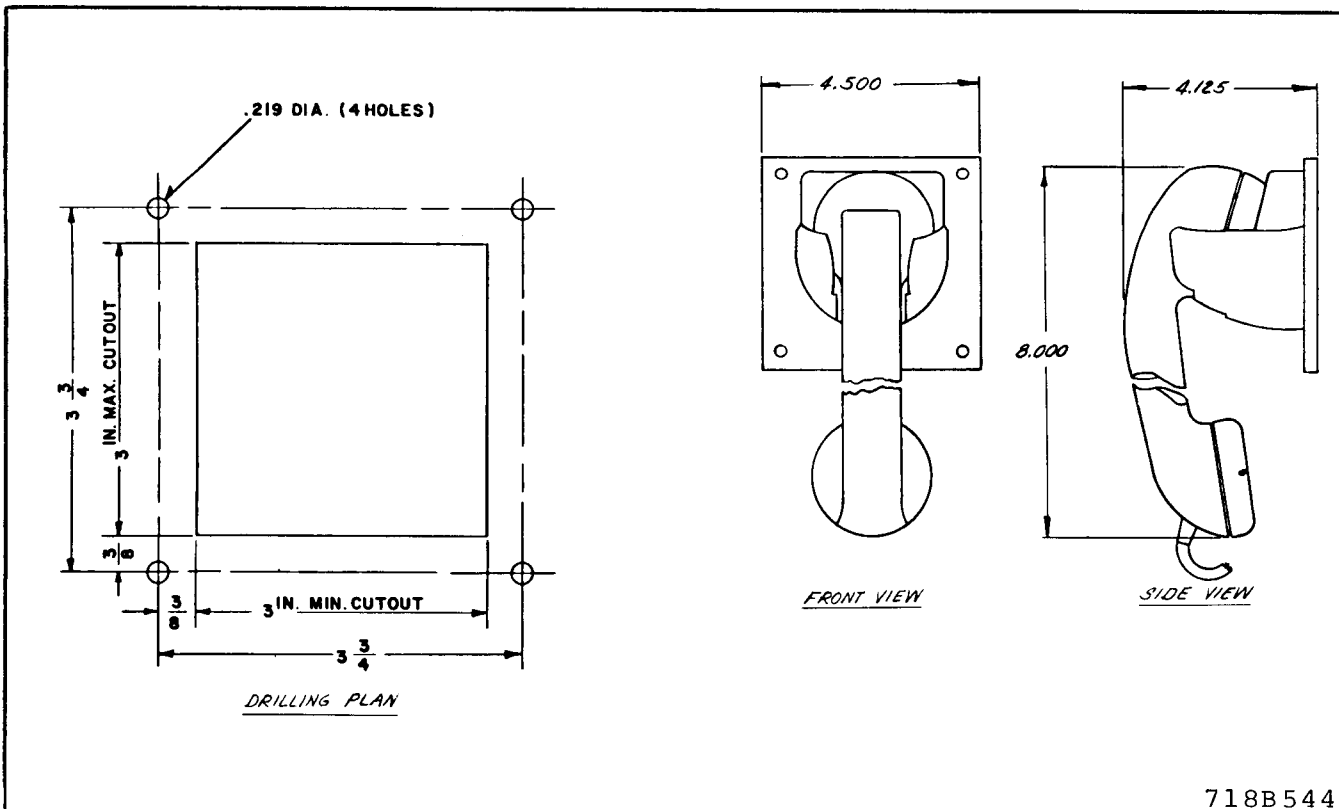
Mounting Dimensions for Panel Mounted Hookswitch- Handset Assembly
